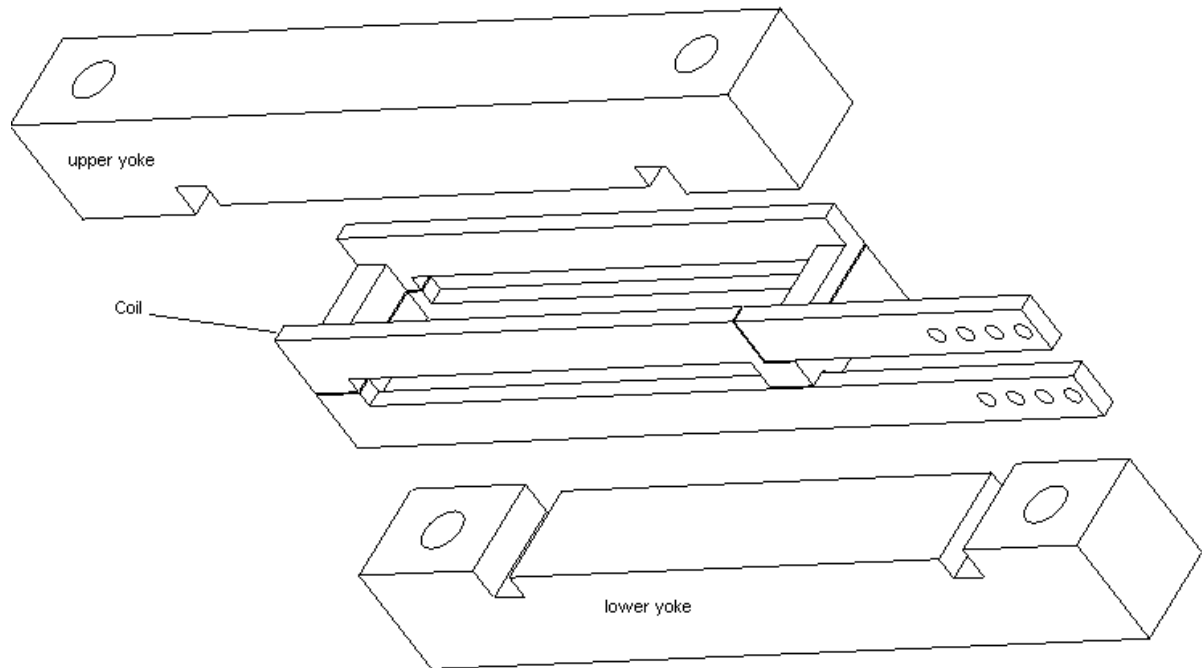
Exploded view of chicane magnet (yoke bolts not shown)
